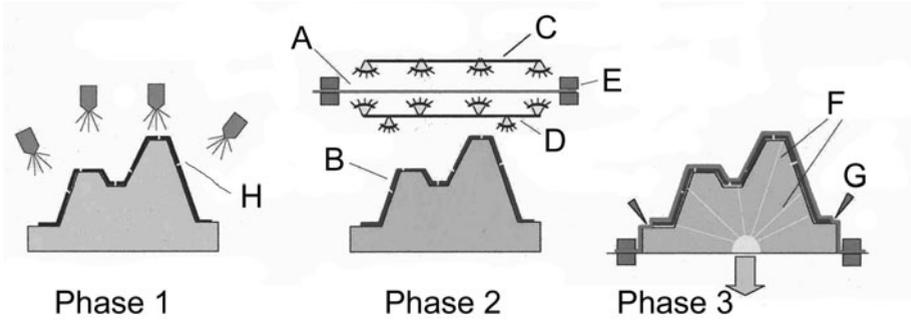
Vacuum thermoforming process: Phase 1, positioning on the support and adhesive application; phase 2, thermo-heating of the covering; phase 3, vacuum thermoforming. Parts: A covering (PVC exp. / TPO exp.), B support with adhesive, C heating upper park lamps, D heating lower park lamps, E frame detention, F vacuum channels, G cutting device, H insert holes.
